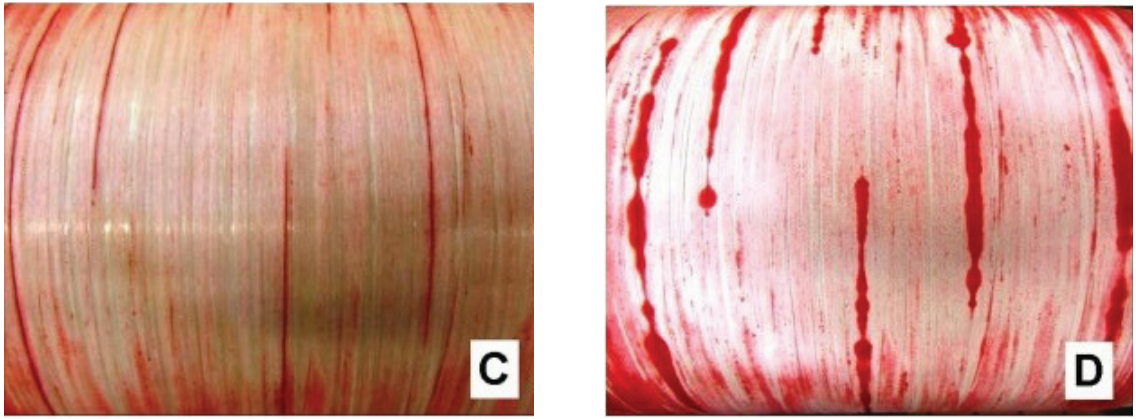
Dye penetrant testing without (left) and with (right) developer to reveal material damage
